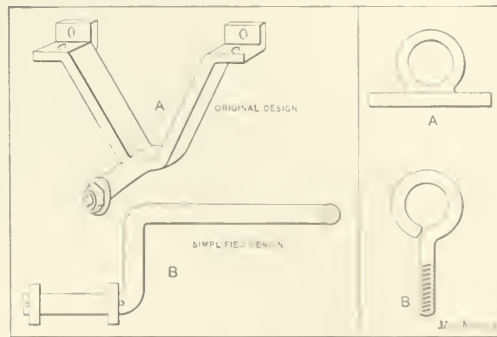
(A) Old Design of Bracket Forging. (B) Simplified Design substituted by Detail Engineer
